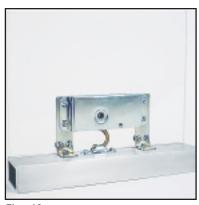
Type 1R Latch with braces and 'U' Receiver used for a self standing machine guard, etc. Quick attachment & removal. (See TDS 40)
